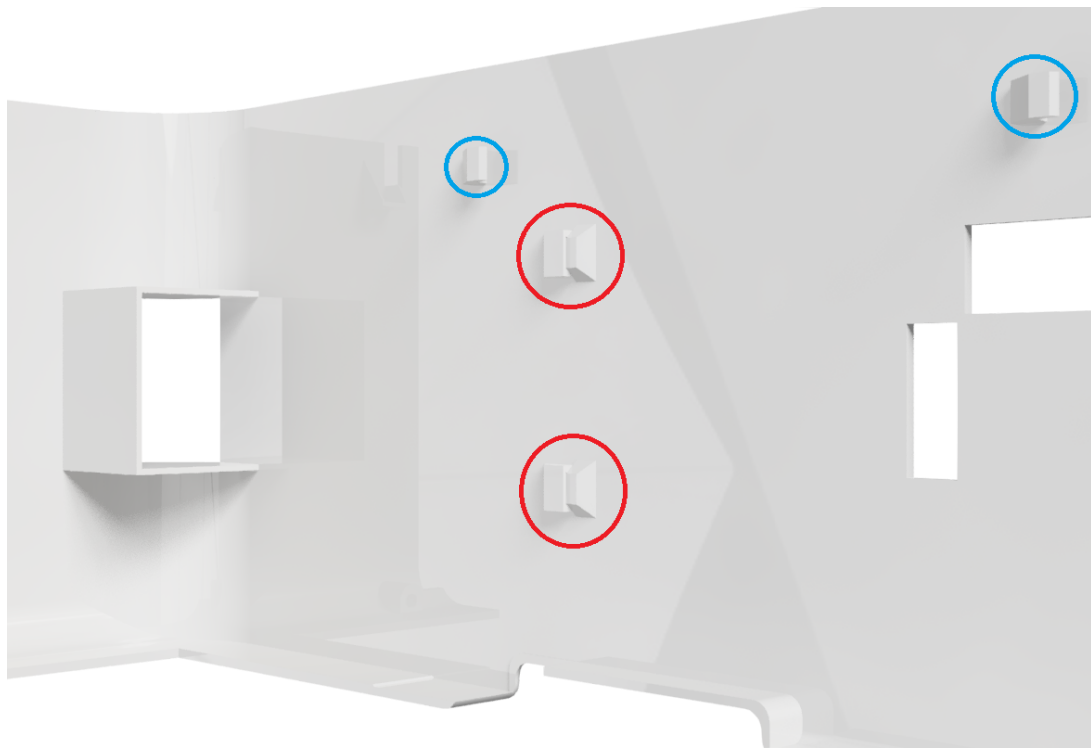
The two parts of the first version side panels modeled in Fusion
